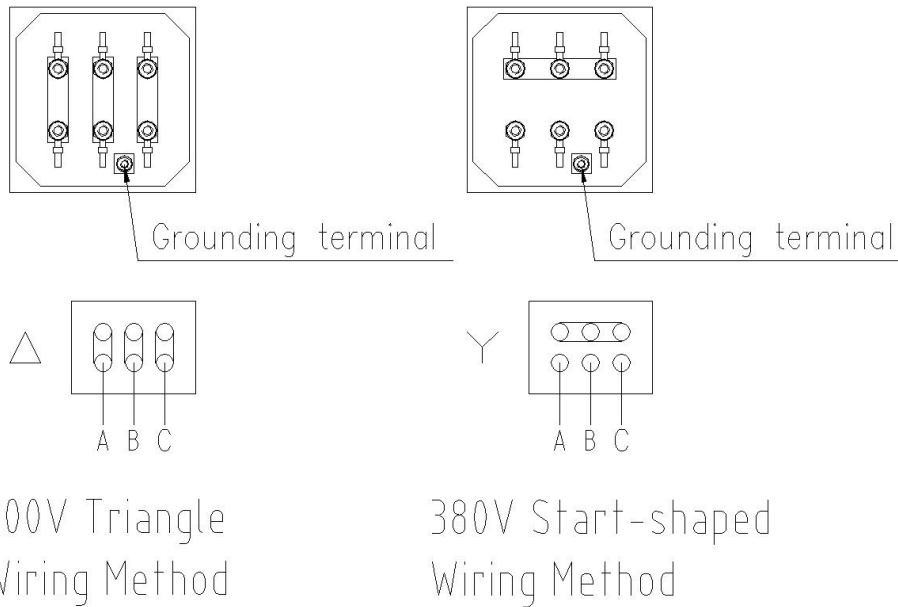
Sketch of Motor Junction Box and Wiring Method
